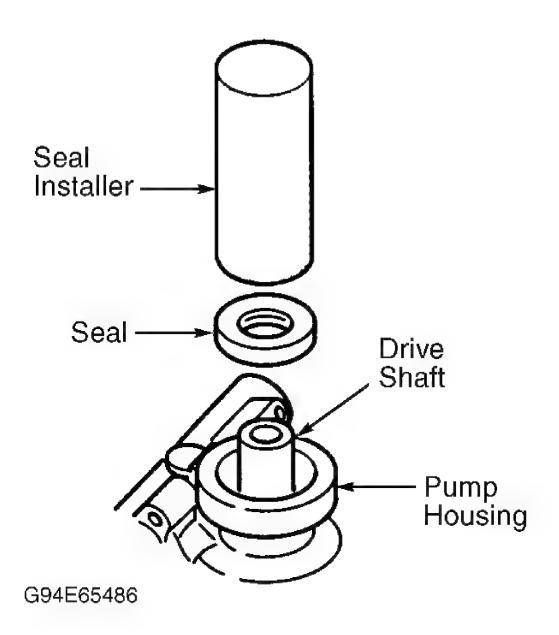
Installing Drive Shaft Seal Courtesy of GENERAL MOTORS CORP.
